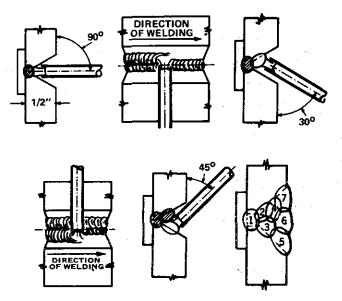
Multi-Layer Deposit - Horizontal Butt Weld
